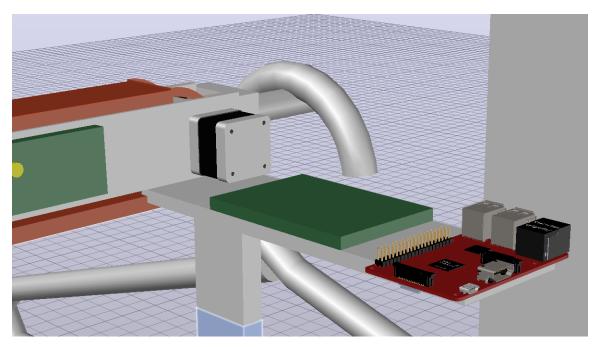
The motor platform along with the main PCB and Raspberry Pi
